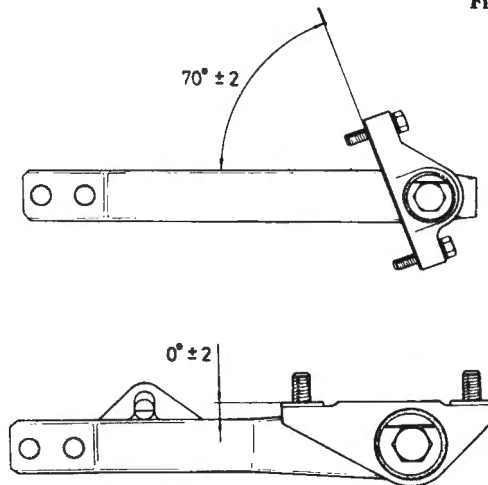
Control arm to bearing bracket angles after tightening the shaft nuts.
